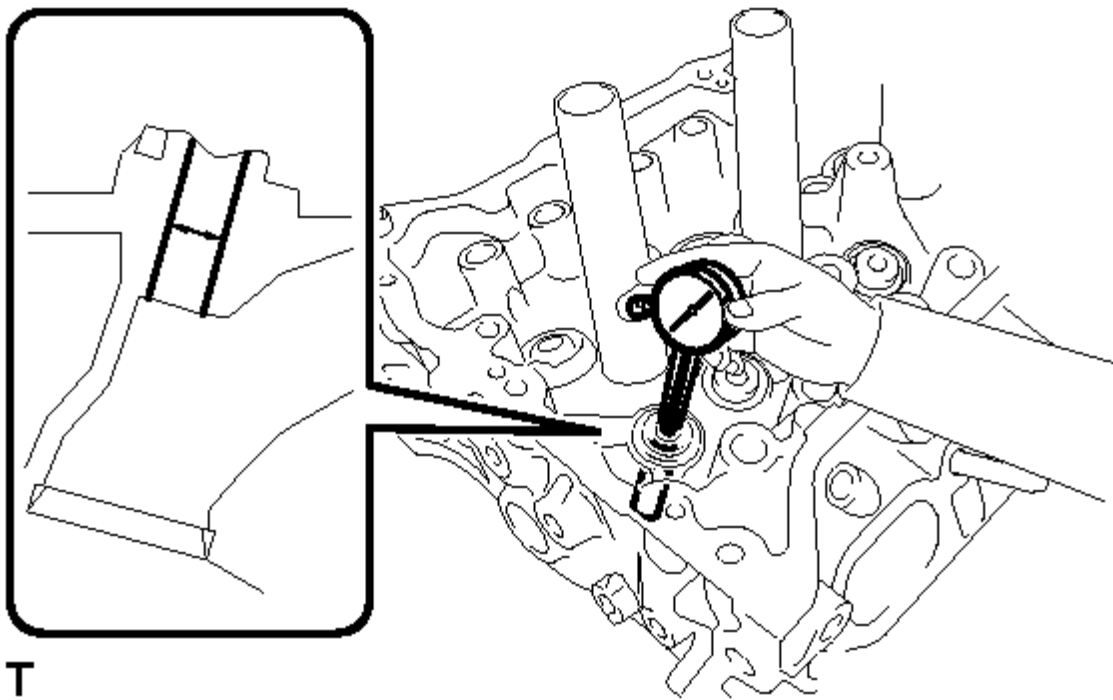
Measuring Bush Bore Diameter Of Cylinder Head Using Caliper Gauge
